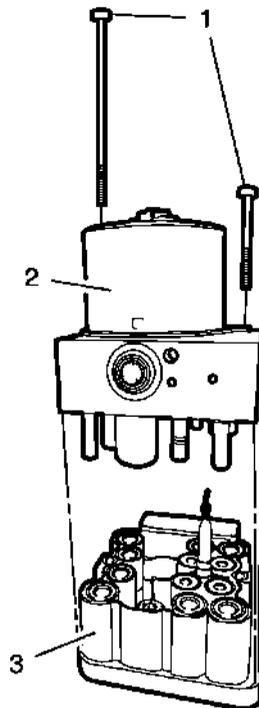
Electronic Brake Control Module, Modulator Valve & Bolts
